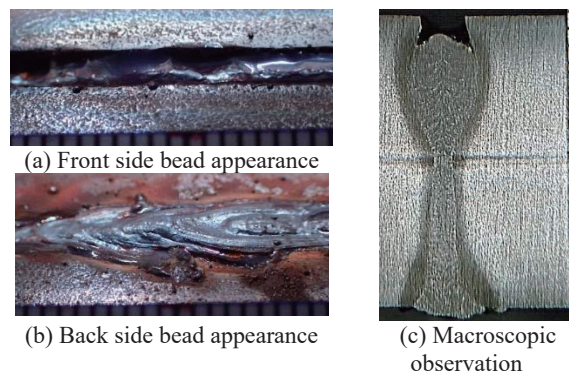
Weld bead appearance and macroscopic observation (ID: B3).
